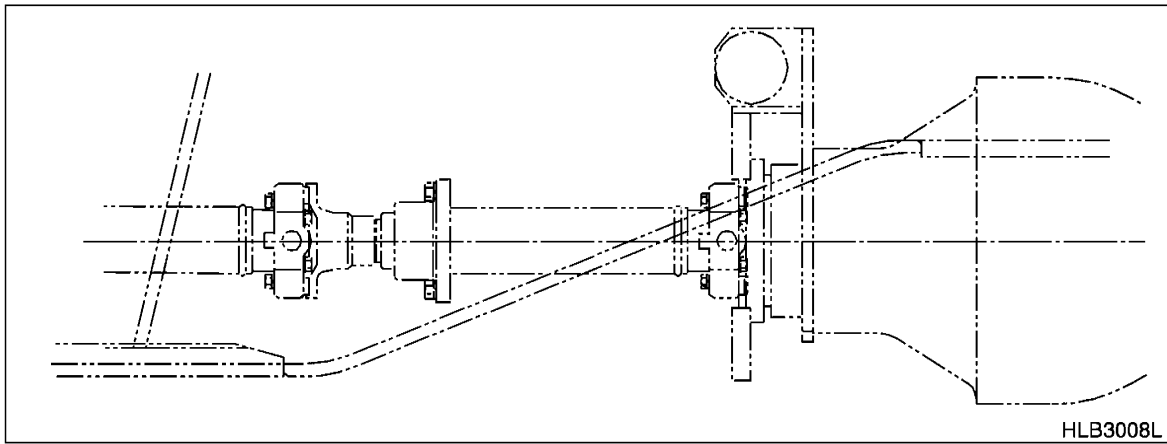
FRONT DRIVE SHAFT CENTER BEARING. GREASE FROM REMOTE GREASE POINT.
